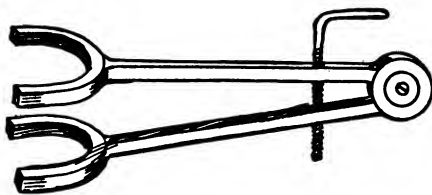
Type of Valve-Spring Tool Which Leaves the Hands Free
